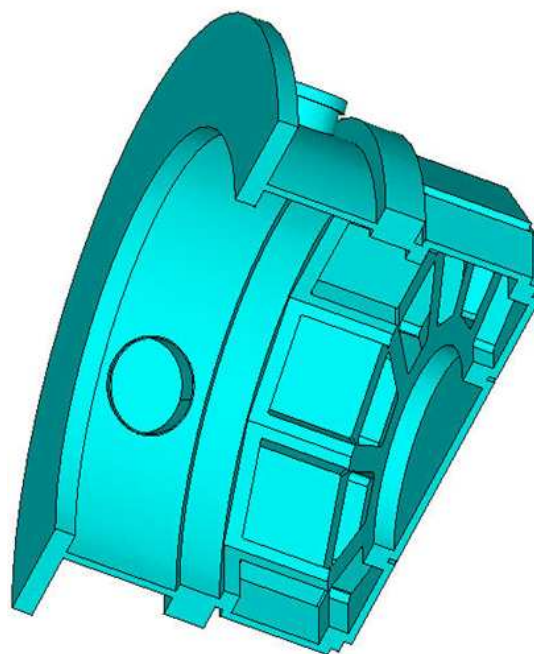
Perspective drawing of the IFB showing the facet covers and the wedge covers.
